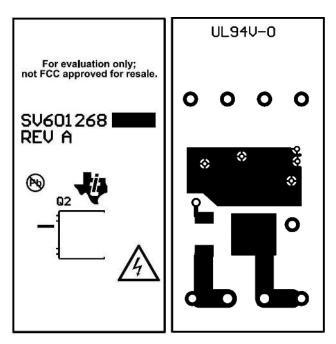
UCC24636EVM Assembly and Copper Drawings (Bottom View)
